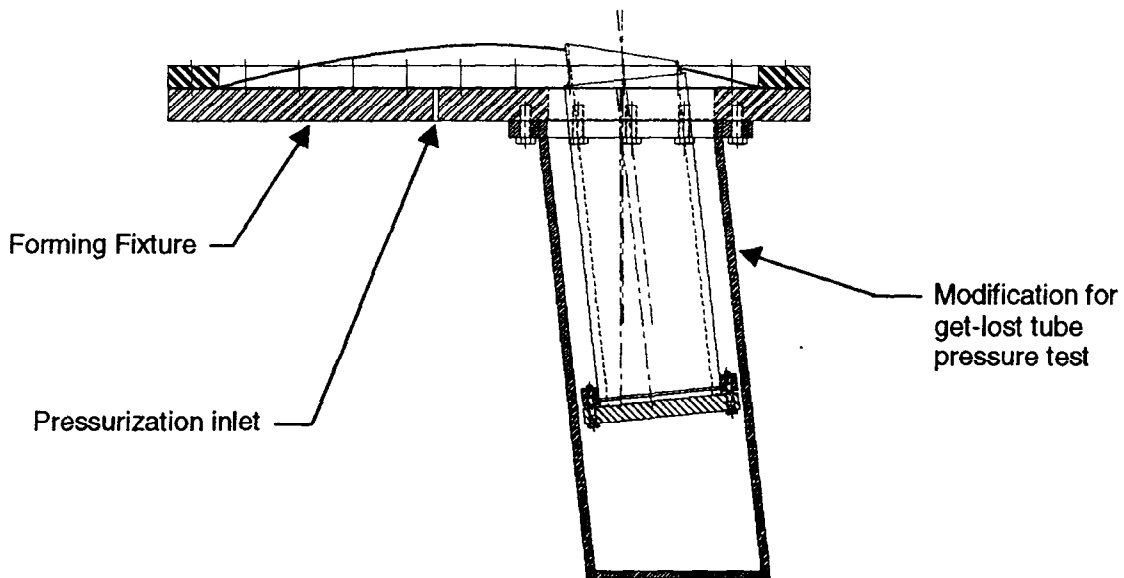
Modification to membrane forming fixture for hydrostatic test
